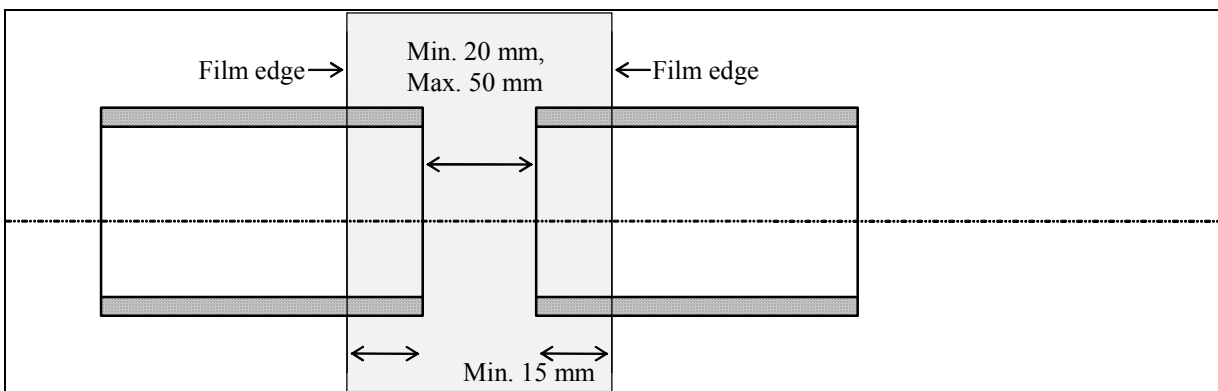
The sketch shows location of film for checking position of pipe ends in mechanical couplings
